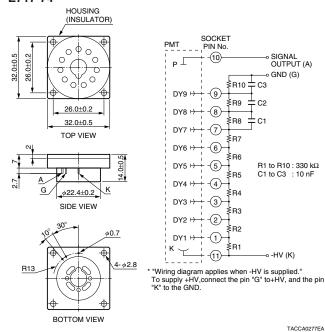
D Type Socket Assembly (Unit: mm) Sold Separately
